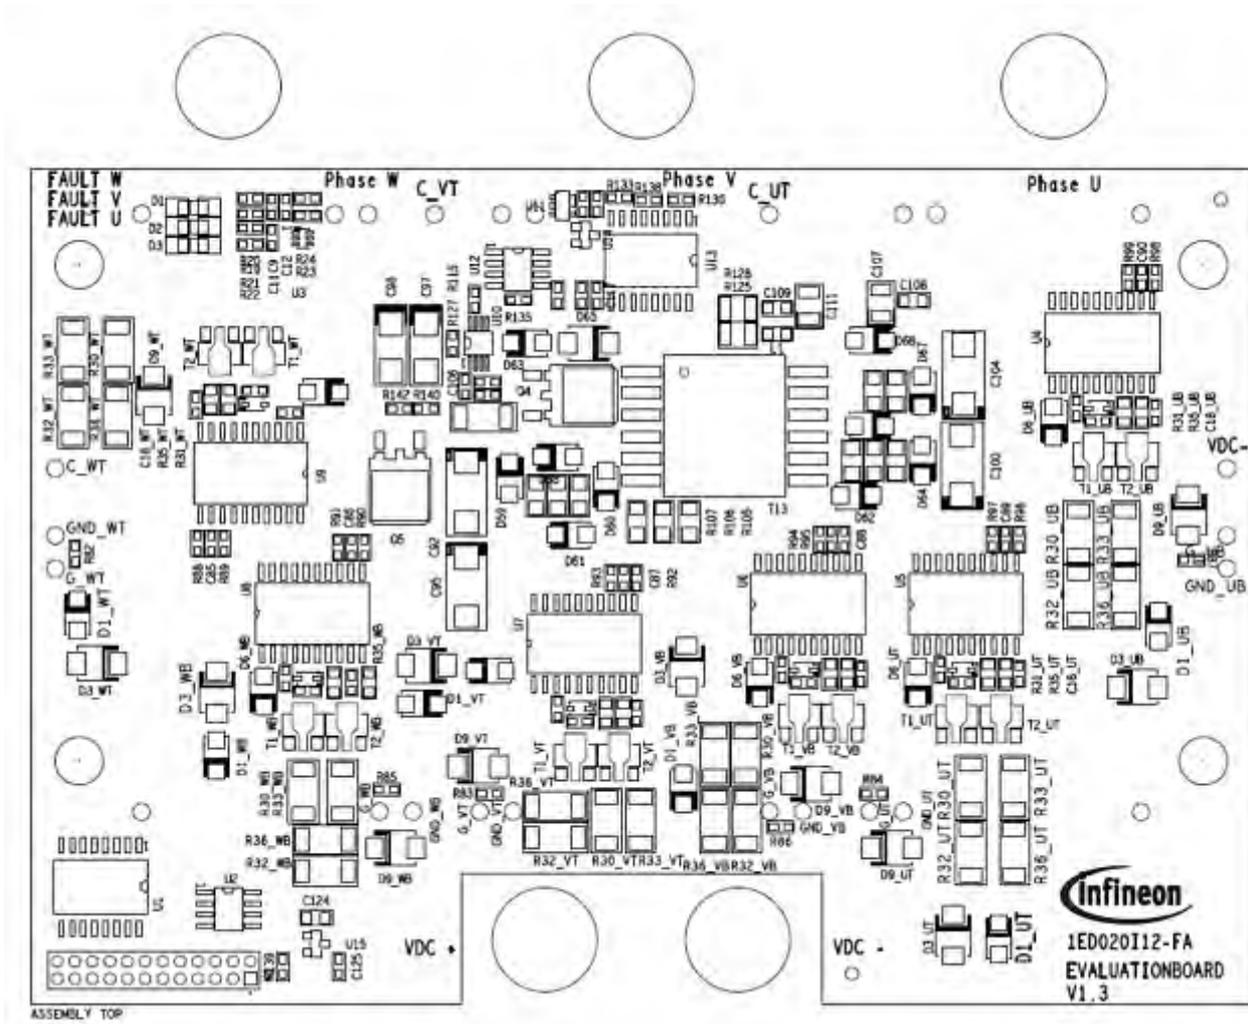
Assembly drawing of the HybridPACK™1 driver board (top)
